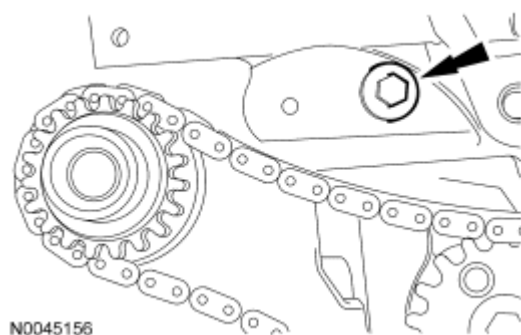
Locating Oil Pump Chain Drive Tensioner Shoulder Bolt
